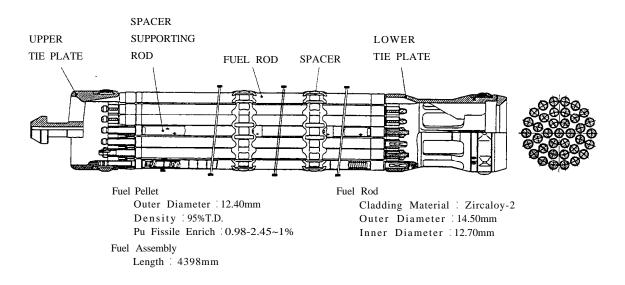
Fig. I Schematic drawing of an ATR36-rod fuel assembly
